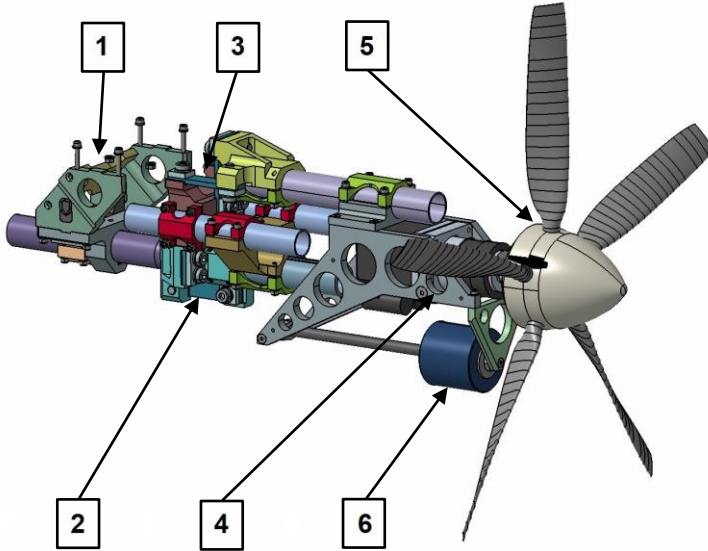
W-STING demonstrator, uncoated nacelle with motor and propeller (1 – sting attachment; 2 – yaw attachment; 3 – pitch attachment; 4 – motor; 5 – propeller; 6 – massbalance weight).
